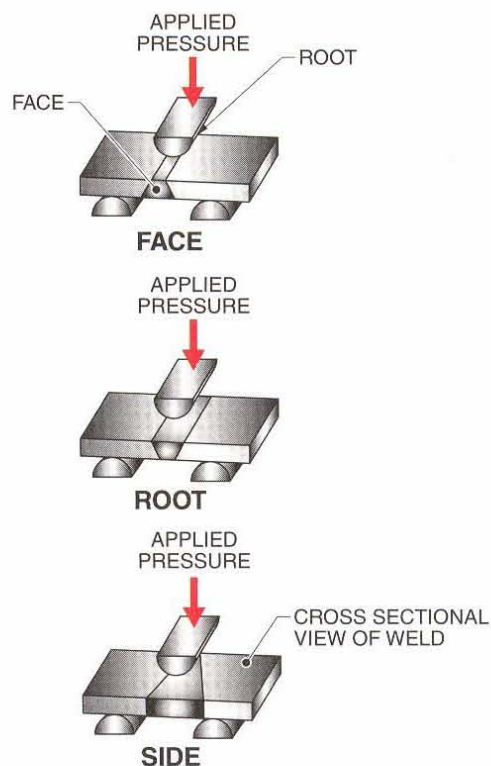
The bend location in a guided bend test may be on the face, the root, or the side of the specimen.
